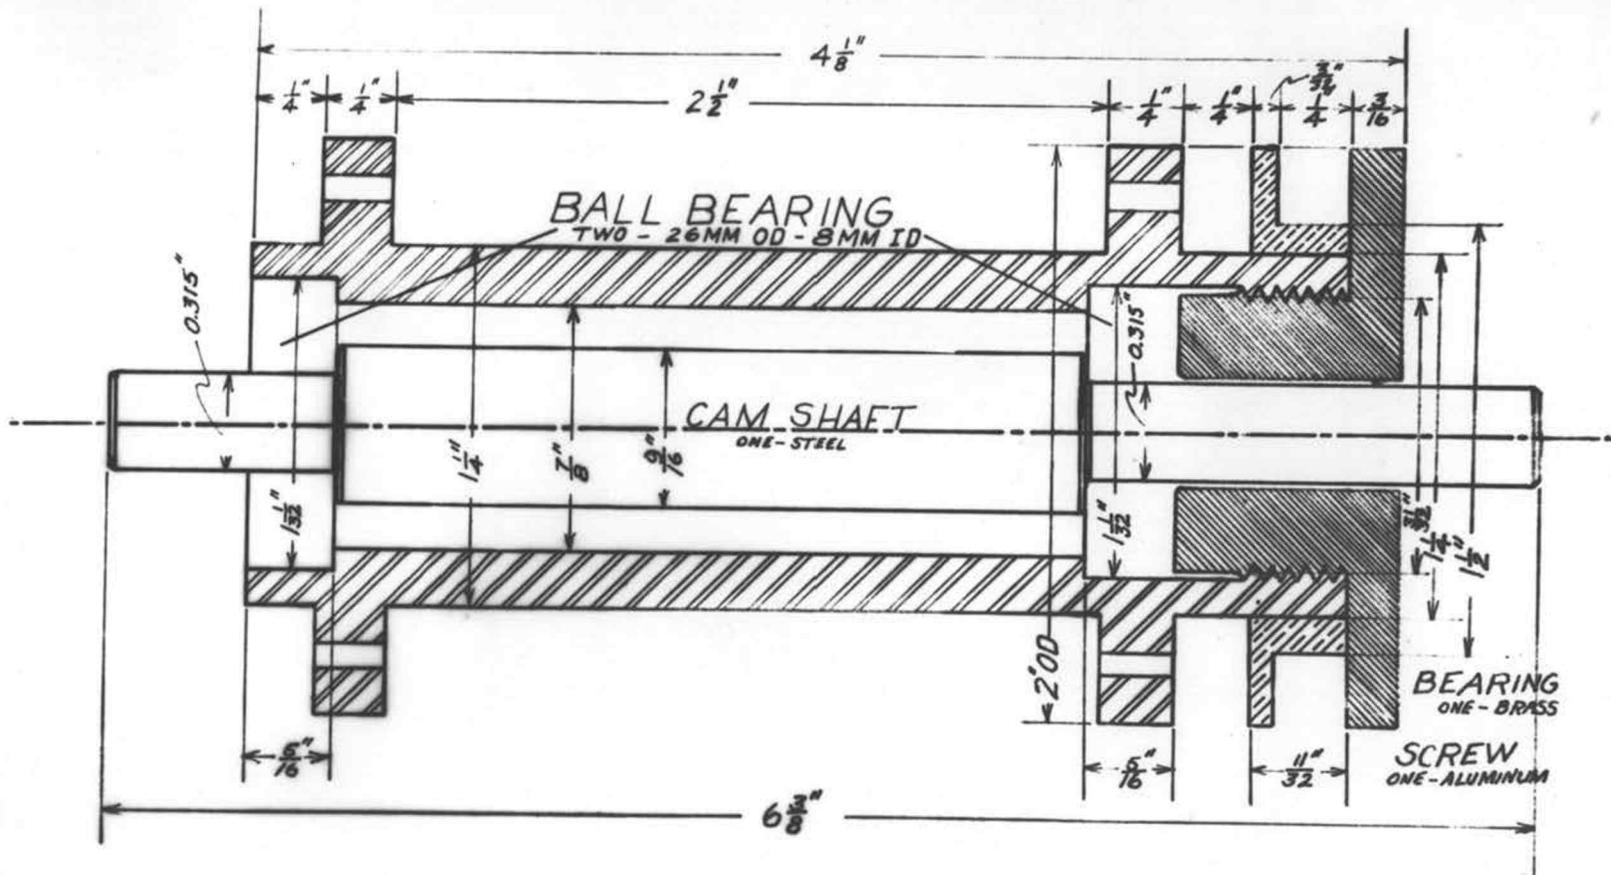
THE CAM SHAFT AND CAM SHAFT HOUSING ASSEMBLY.
